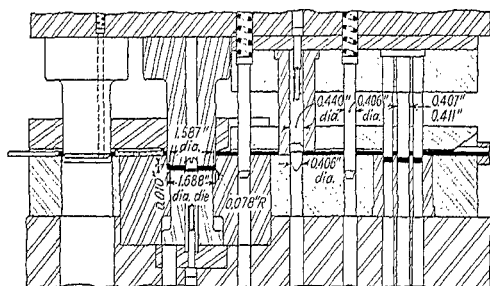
Progressive die to produce a coined brass part. (Harig Mfg. Corp.)
